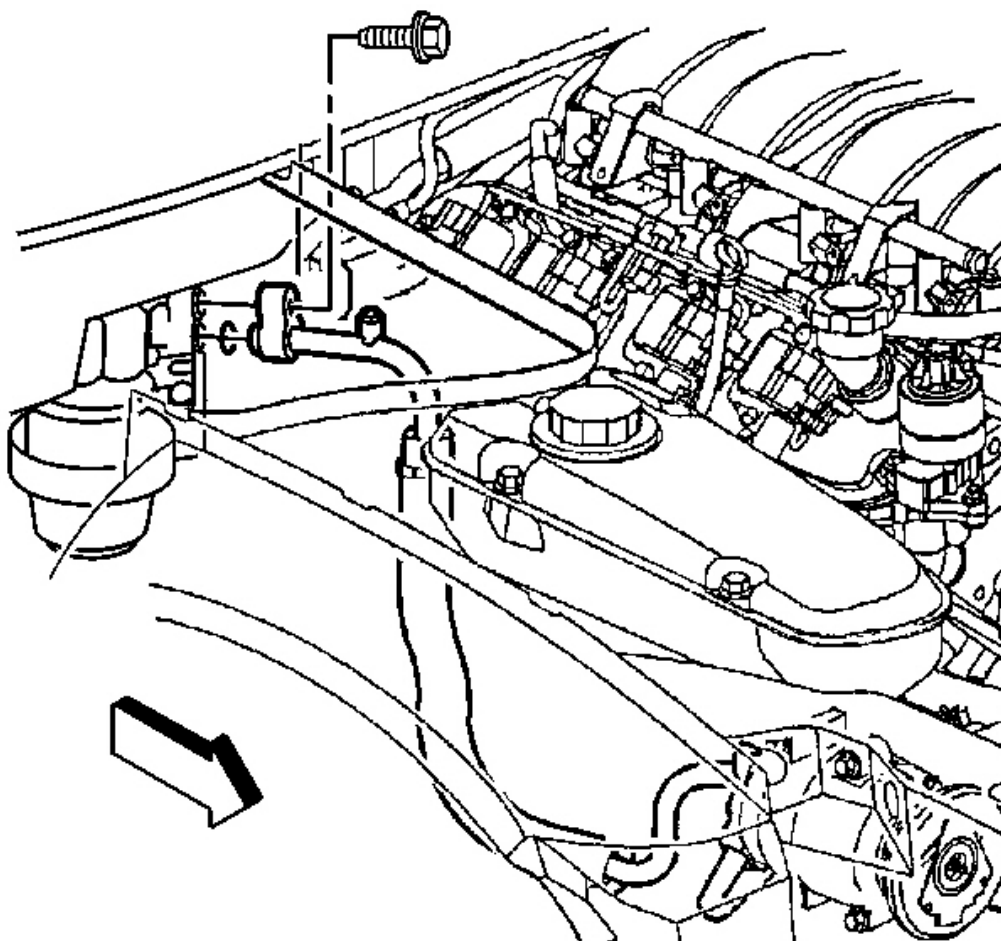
Accumulator, Retaining Bolt & Compressor Hose Assembly
